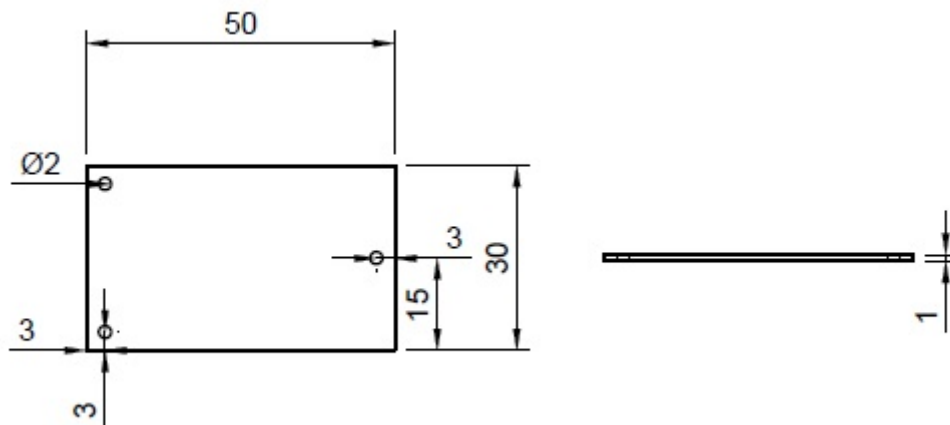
The heater bottom plate is a simple rectangle 30x50mm with a three holes 2mm in diameter to match the heater main body for an easy assembly.
